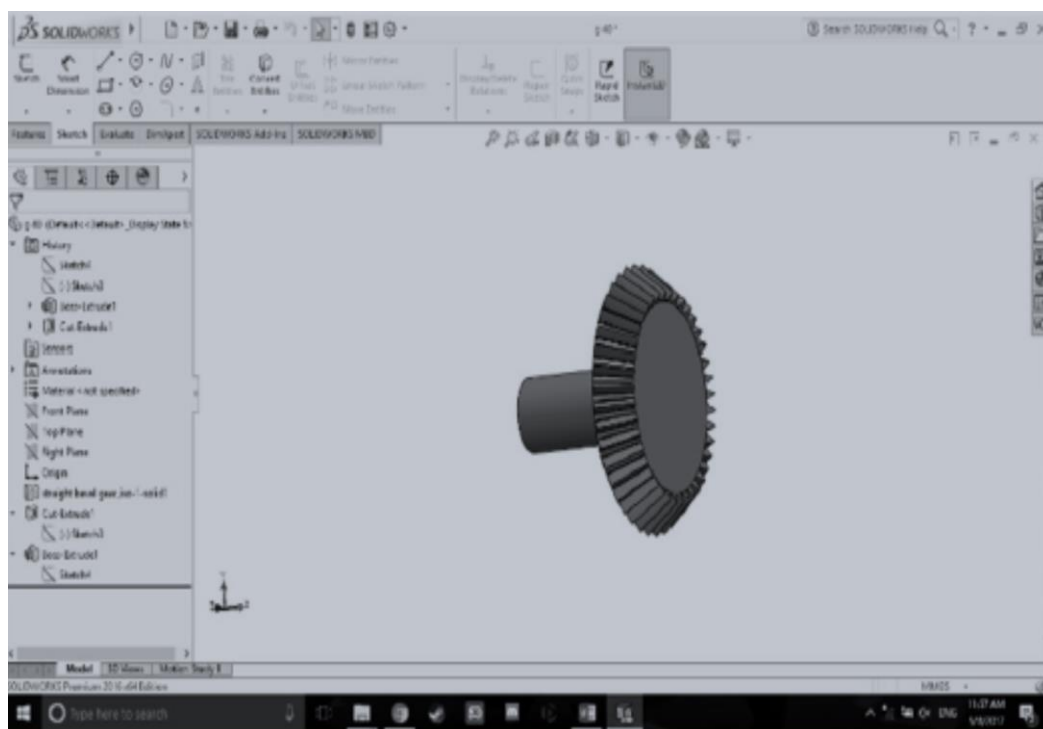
This figure represents the modelling of ring gear in solidworks. It is created by drawing the bevel gear profile from prerequisites and removing the faces of bevel gear tooth for 45 deg mating of other gears for assembly and adding an extrude stub axles to it. The ring rotates while the vehicle is taking a turn. It rotates in its own axis.
